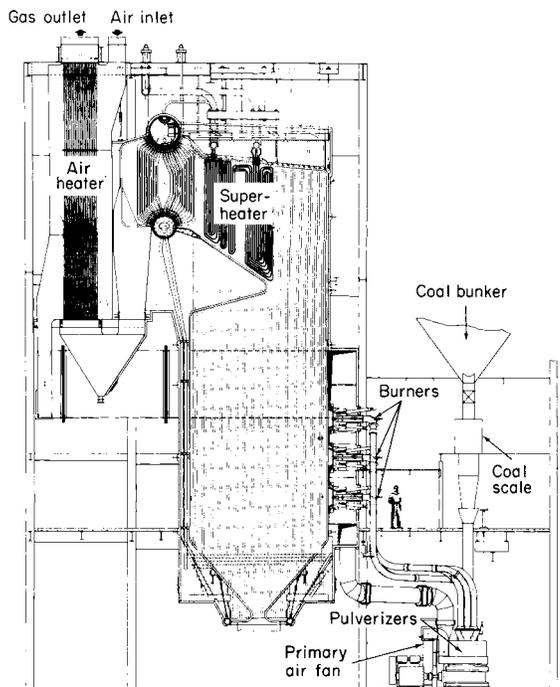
Two-drum type of boiler designed for pulverized-coal firing.
